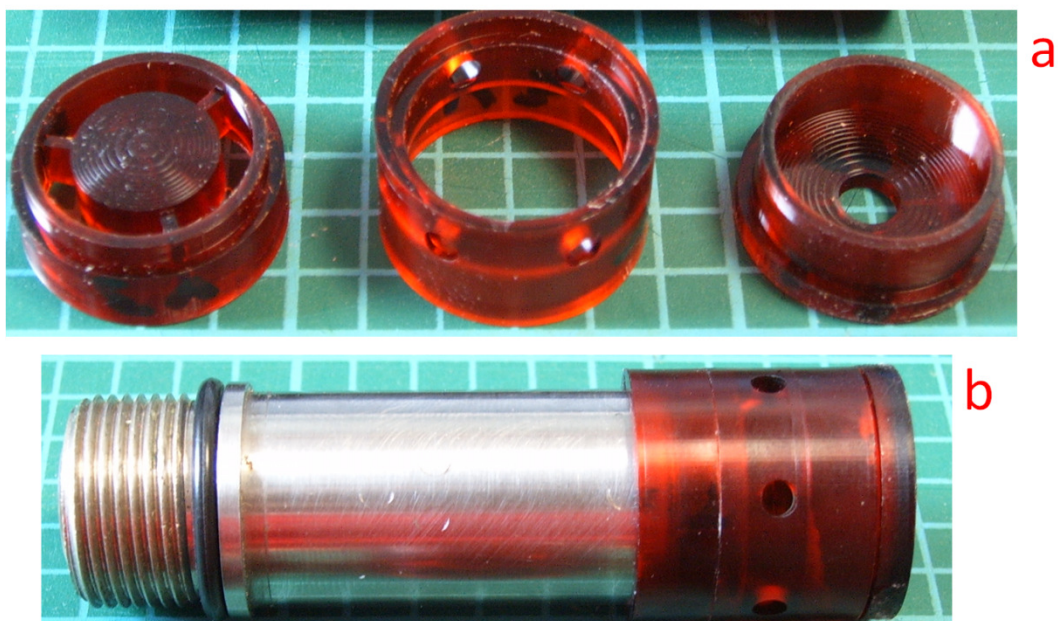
Photographic images of (a) MSL fabricated component of focusing device, (b) assembled components mounted onto the end of the host transducer
